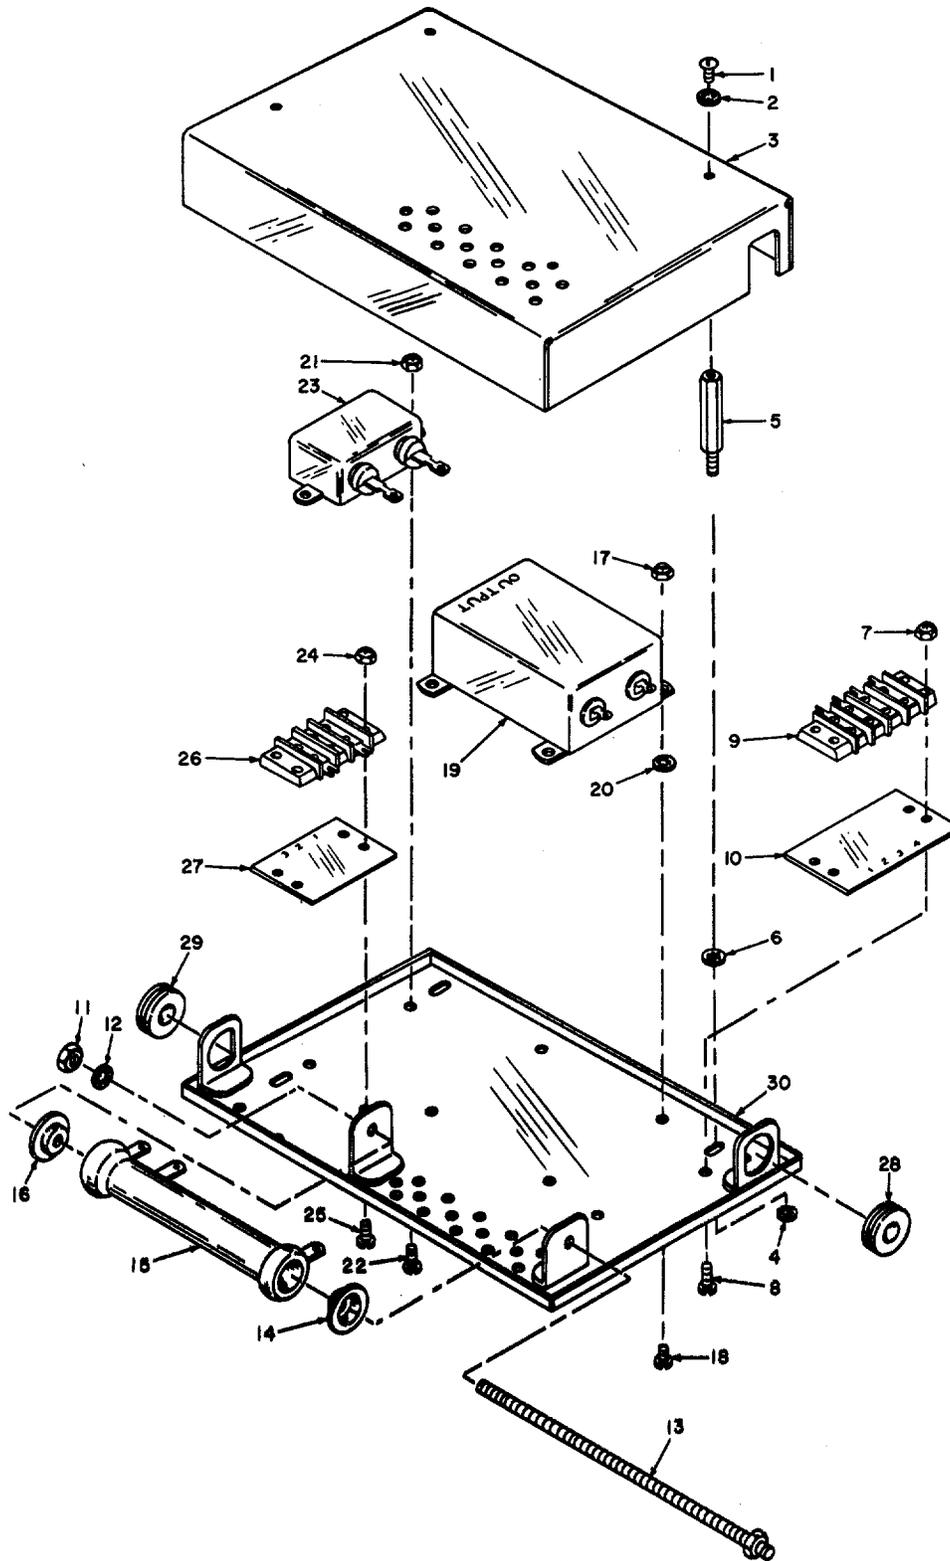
Motor suppression filter unit, exploded view (TT-76A/GGC and later models).
